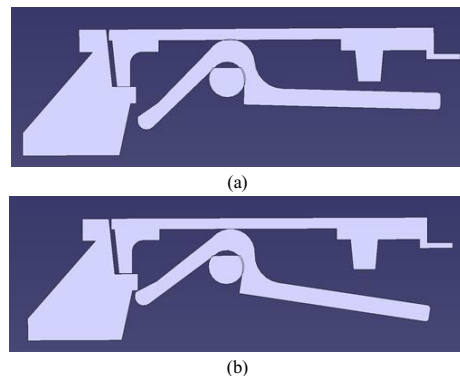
Sectional view of the universal locking-type manhole (a) open (b) locking
